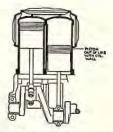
Cylinder bore that is at right angles with the base, and one that is not. The right cylinder is at rear of engine. The cylinder bore is leaning to the rear.
